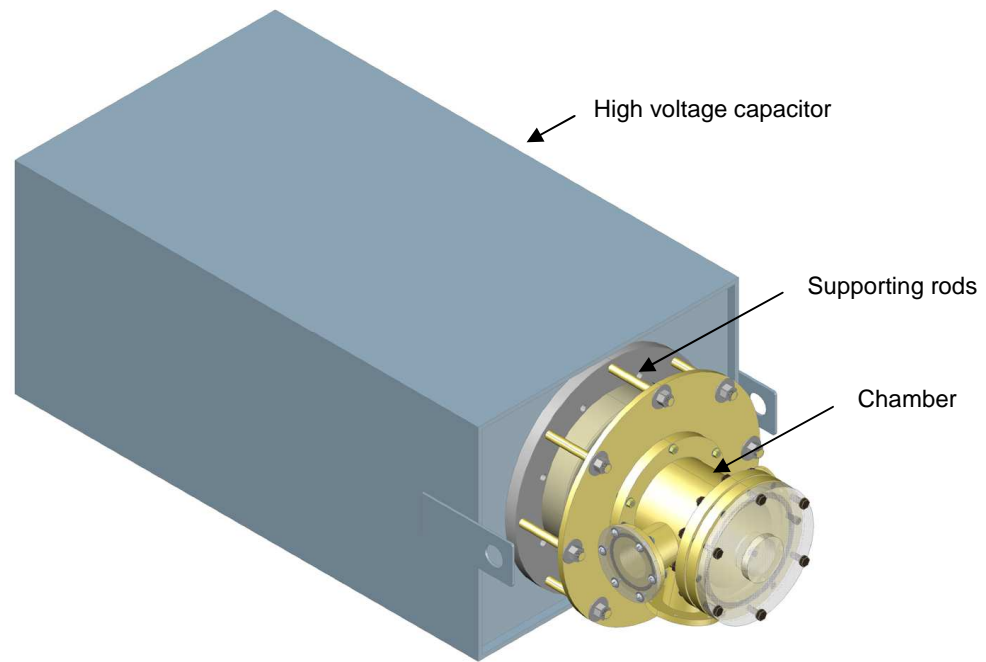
The 3D CAD diagram of the wire explosion circuit without the charging and triggering unit.
